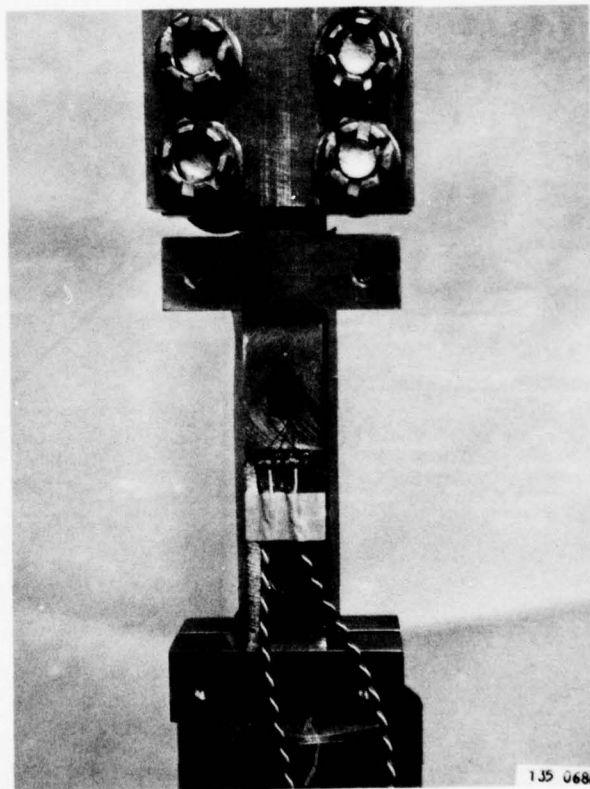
Compression Fixture and Test Coupon with Strain Gages
